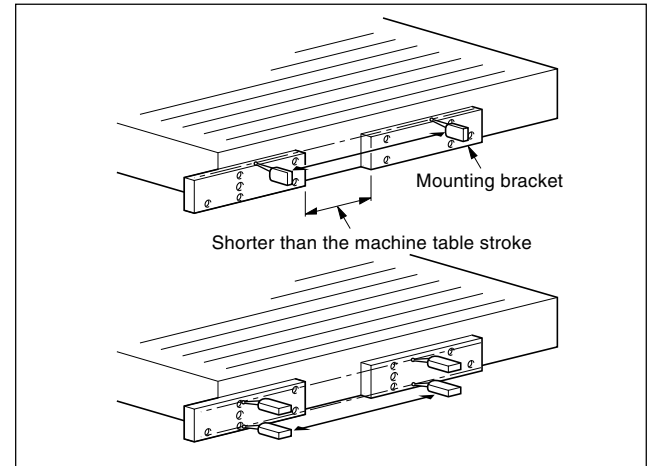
Length of mounting brackets and measurement of their parallelism
